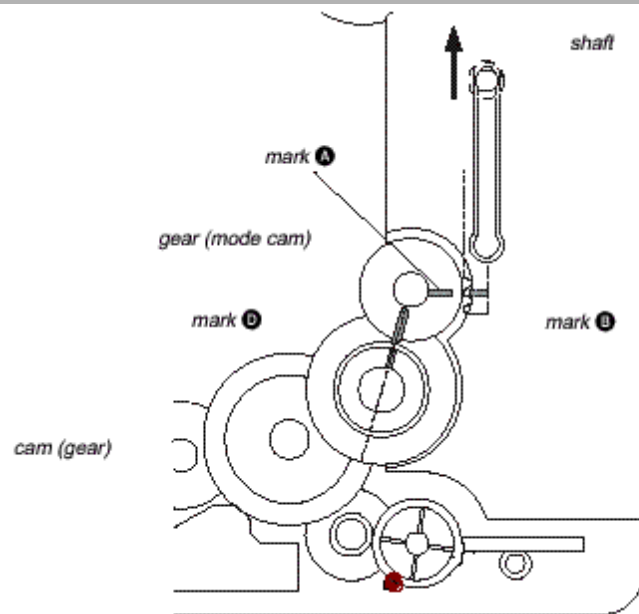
DISC TO STACKER GEAR ALIGNMENT 2 (DISC UNCLAMPED)
